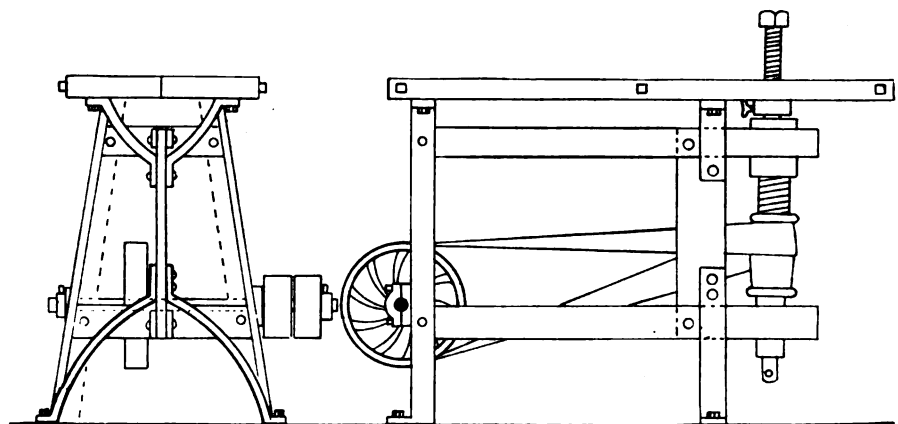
A HOME-MADE WOOD-WORKING SHAPER.
